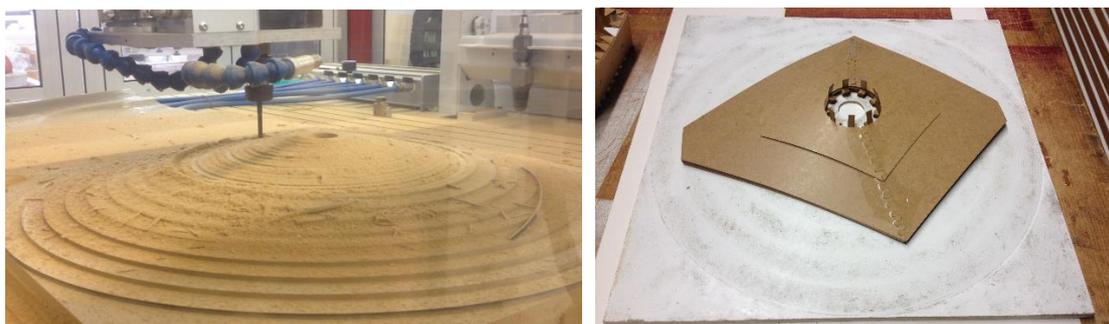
4 Fabrication of the covering membranes- CNC milled mould (A) and the fabrication (B)
